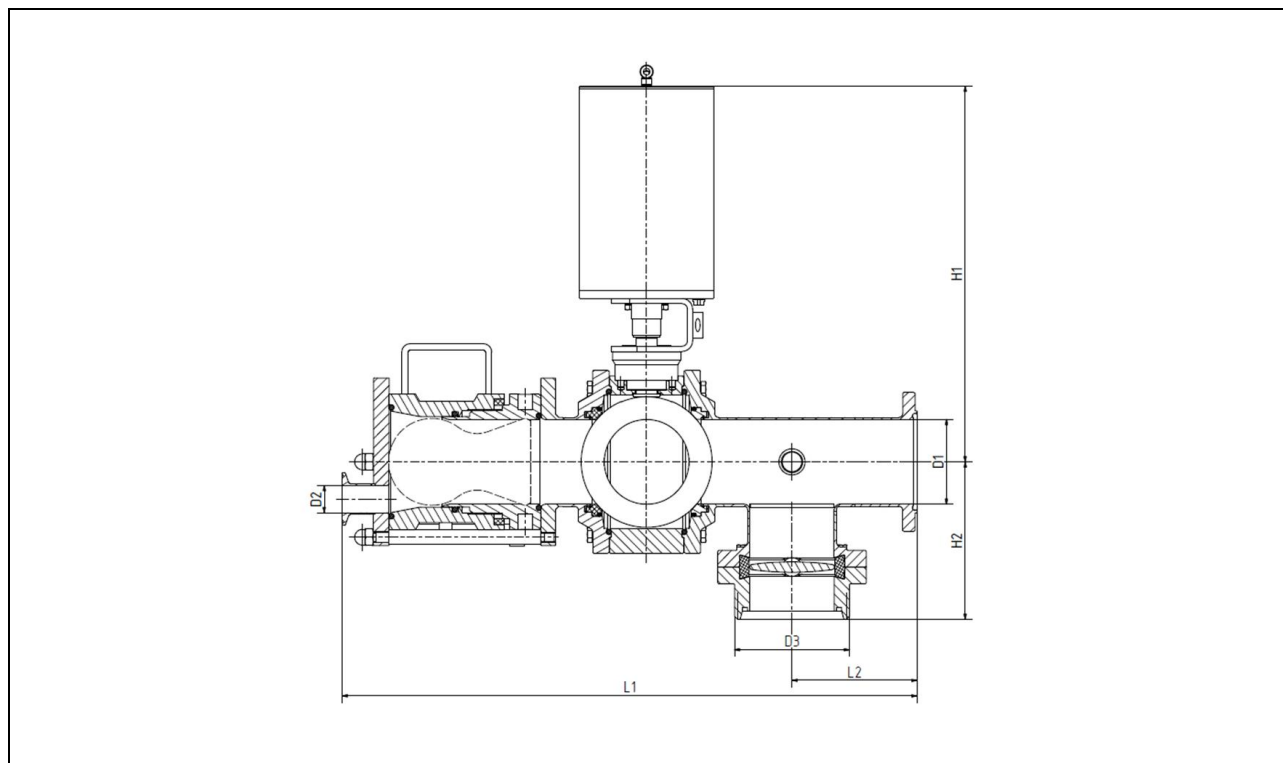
Plug-in Chamber with Ball Valve and Butterfly Valve, Connection Variant DIN, Series A
